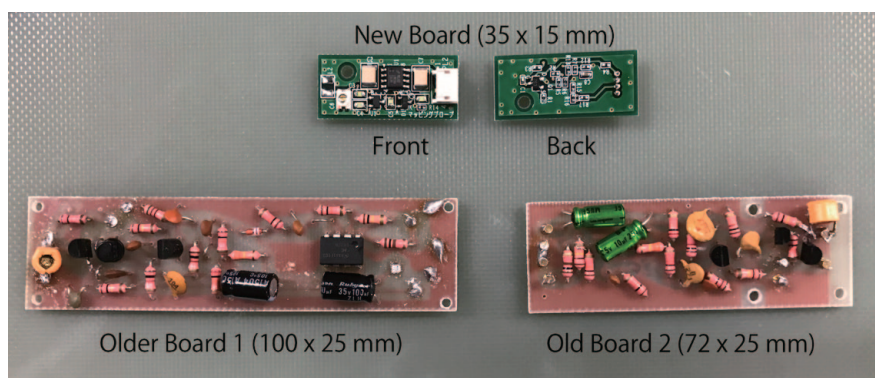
Newly developed read out board. Two older boards are also shown at the bottom.
